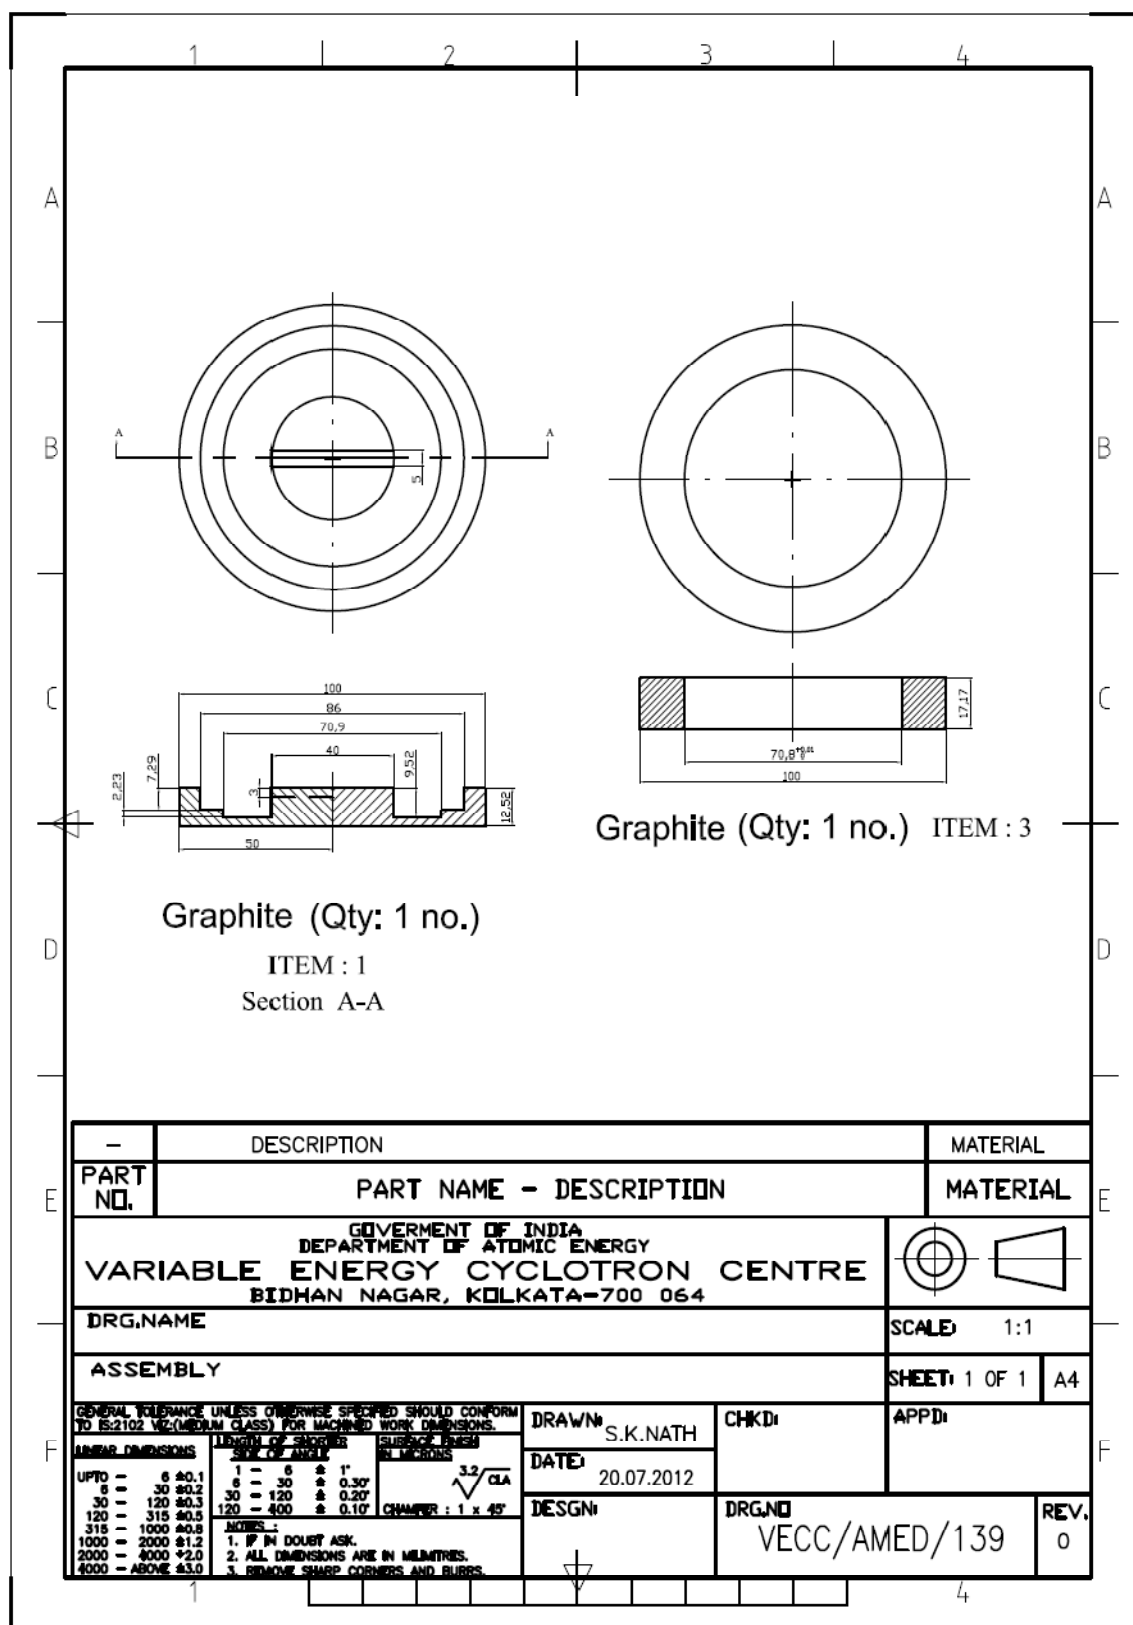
Picture of drg. for graphite tooling fixture parts
